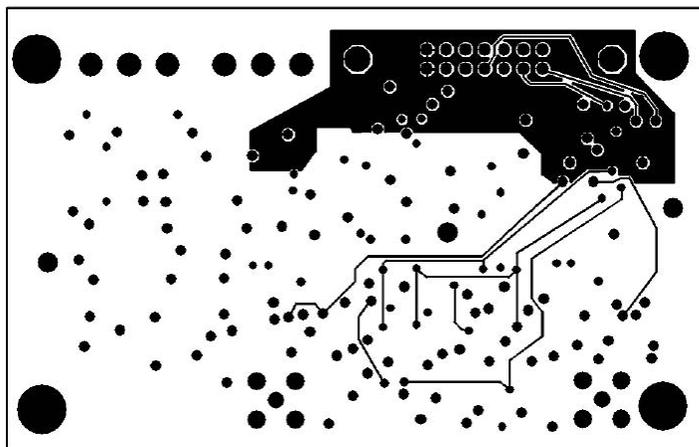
Layer 4 (bottom layer) of the PCB layout
